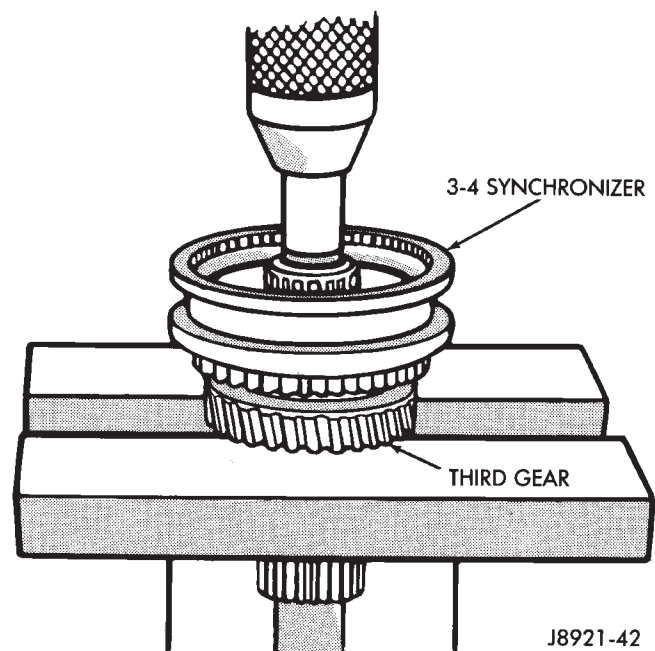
Remove 3-4 Synchronizer And Third Gear
